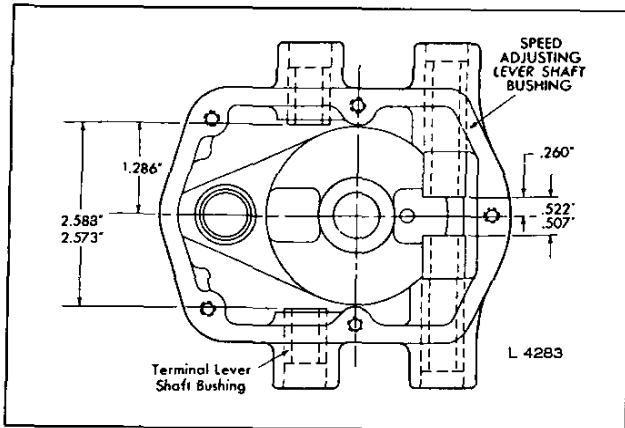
Location of Speed Adjusting Lever and Terminal Lever Shaft Bushings in Governor Housing
